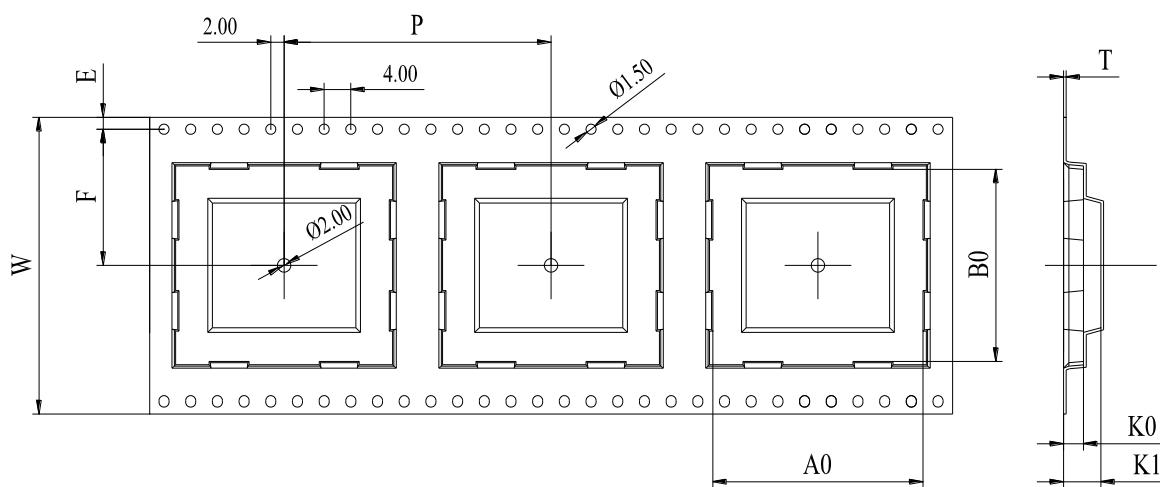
Carrier Tape Dimension Drawing (Unit: mm)
